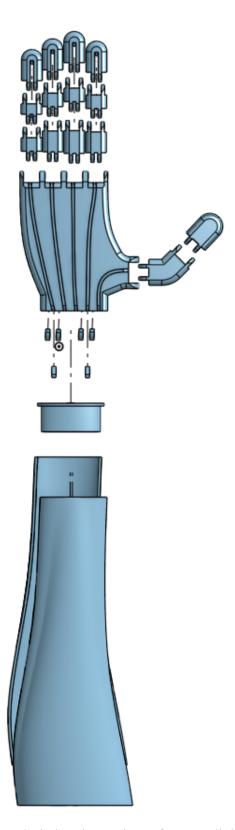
Exploded, palmar view of transradial prosthesis prototype (full forearm and hand)
